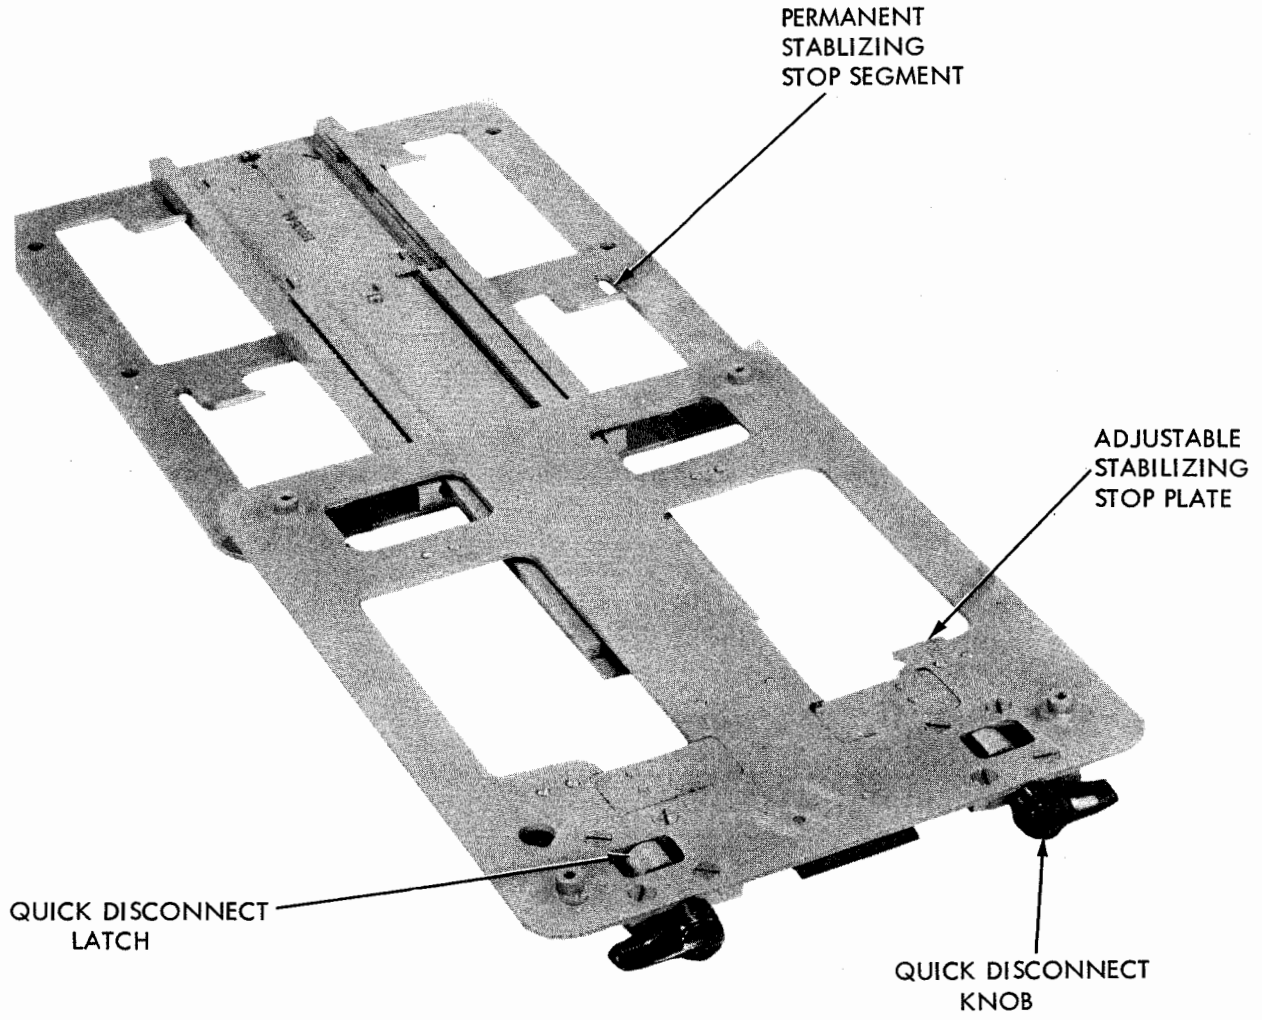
28 Sliding Subbase Assembly For Miniaturized Receiving-Only Typing Reperforator Set (Extended - Front View)
